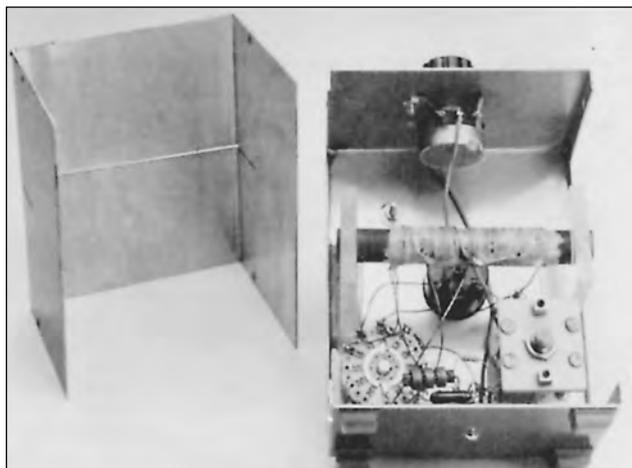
The current probe just before final assembly. Note that all parts except the ferrite rod are mounted on a single half of the $3 \times 4 \times 5$ -inch Minibox (Bud CU-2105B or equiv.). Rubber grommets are fitted in holes at the ends of the slot to accept the rod during assembly of the enclosure. Leads in the RF section should be kept as short as possible, although those from the rod windings must necessarily be left somewhat long to facilitate final assembly.
